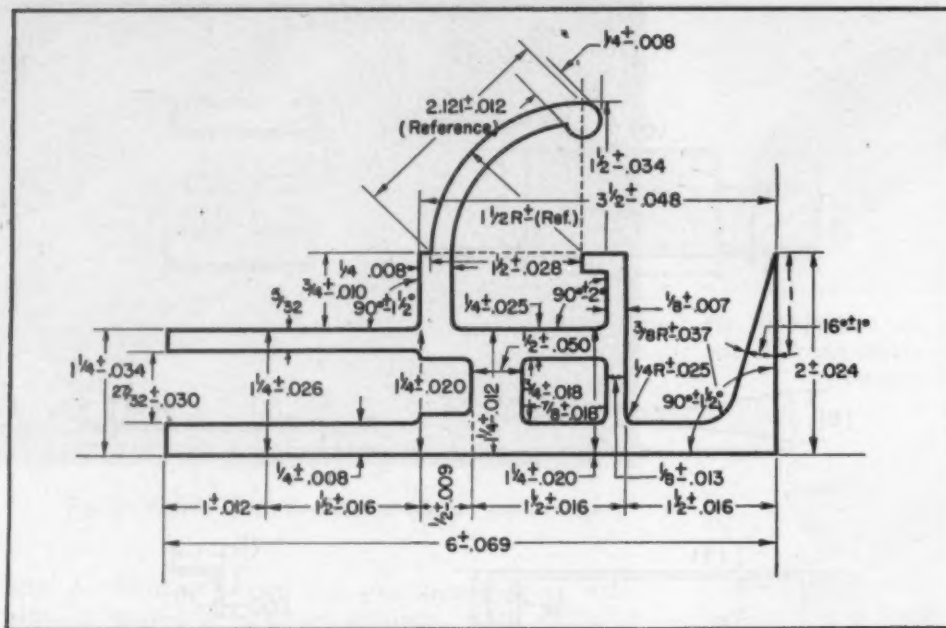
Example of dimensional tolerances applied to an extruded shape. Tolerances are listed in Tables 1 and 2
